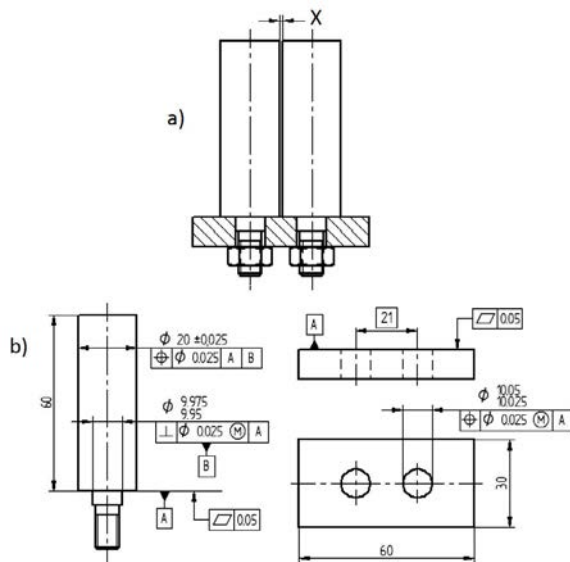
Example: (a) assembly; (b) toleranced parts.
